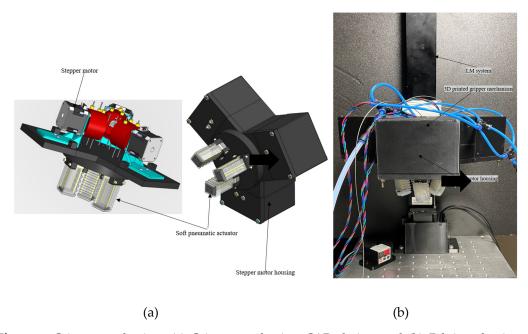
Gripper mechanism. (a) Gripper mechanism CAD design, and (b) Fabricated gripper mechanism mounted on an LM system.
